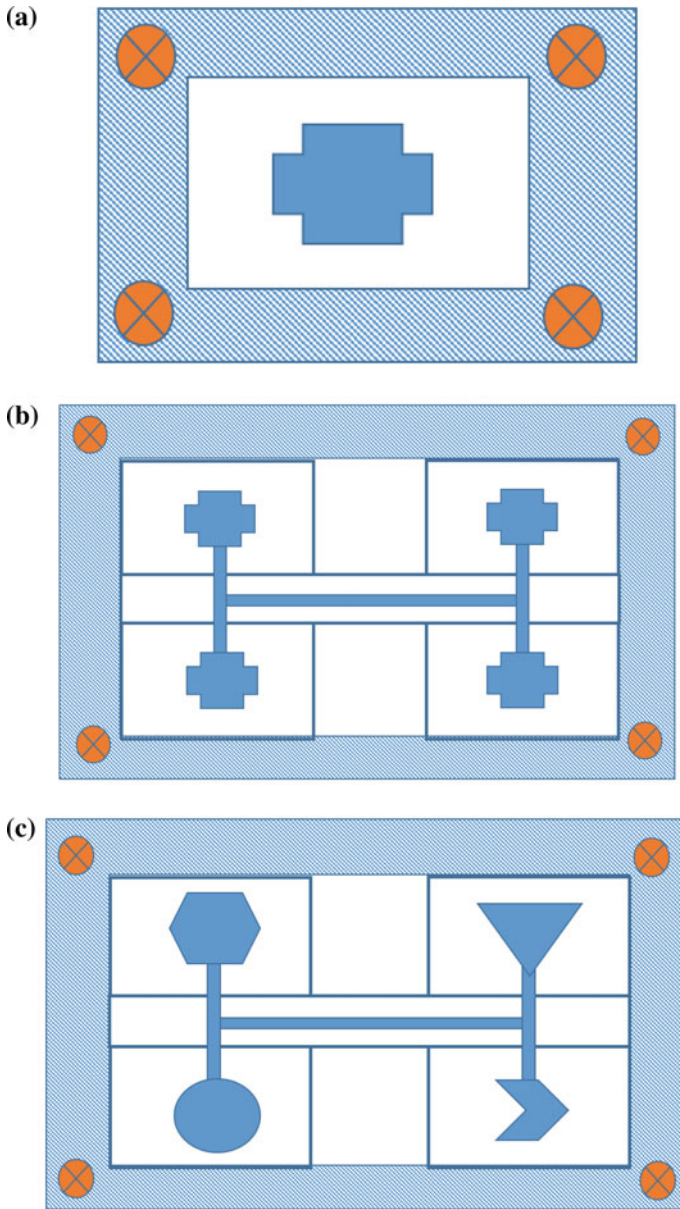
a Single cavity molds, b dedicated multi-cavity molds and c family of multiple cavity mold
